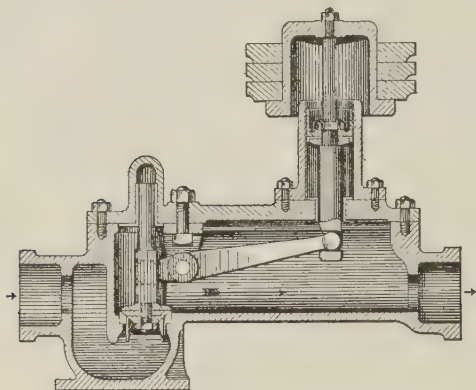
Pressure-reducing Valve (Caldwell's)
